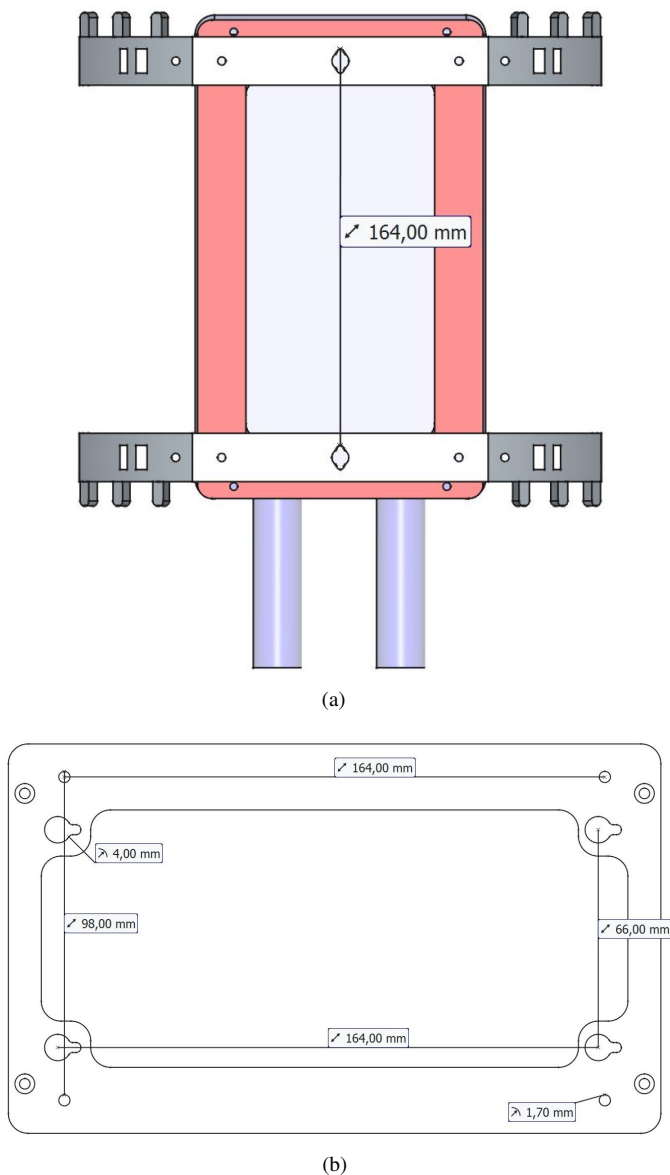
Dimension of mounting holes on the brackets (a) or on the main board (b). Use M3 screws to mount the brackets.
